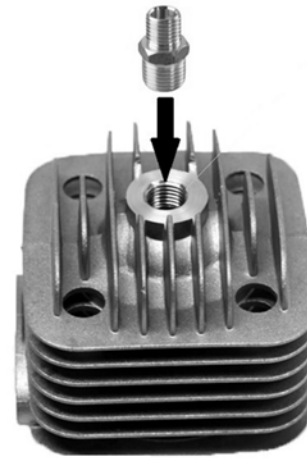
Modified cylinder head ready for fitting adapter nipple.
